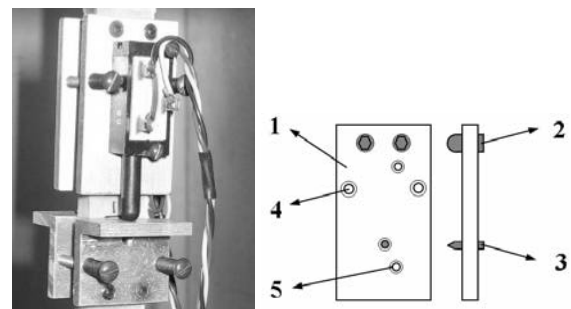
Upper sensor holder: 1 – aluminum body; 2 – spherical threaded tack; 3 – sharp threaded tack; 4 – threaded hole for connecting screws; 5 – threaded hole for sensor fixture.
